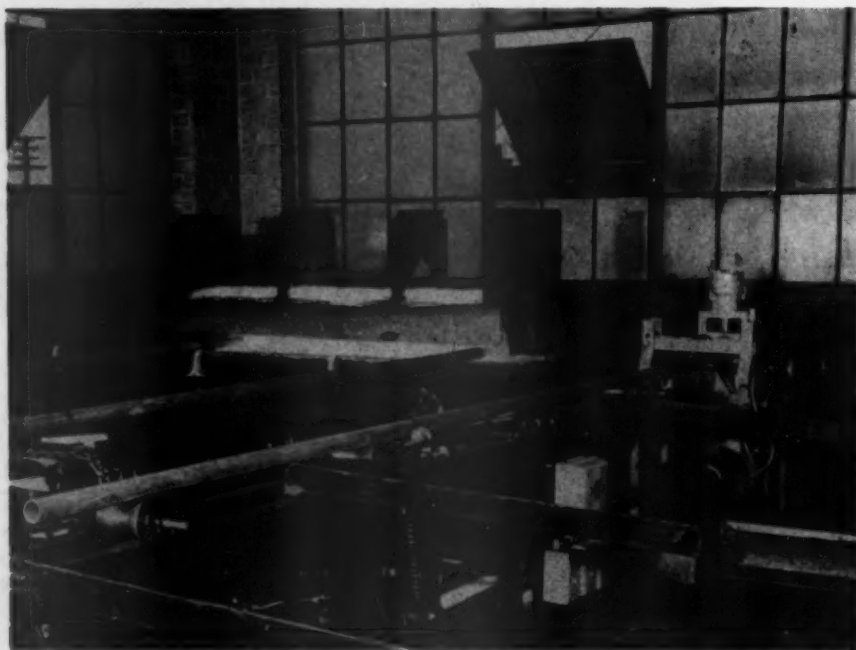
Equipment for heating and swedging after safe-ends have been welded on
